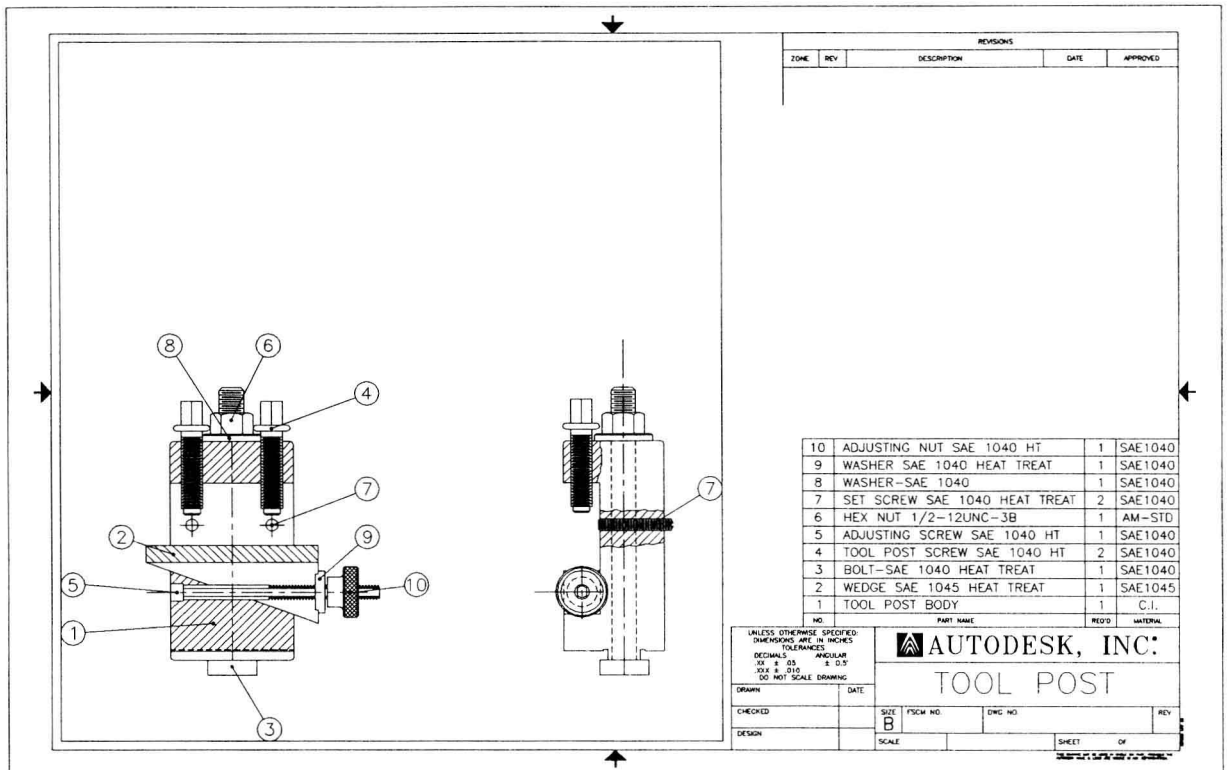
Mechanical assembly drawing (Autodesk, Inc.).
